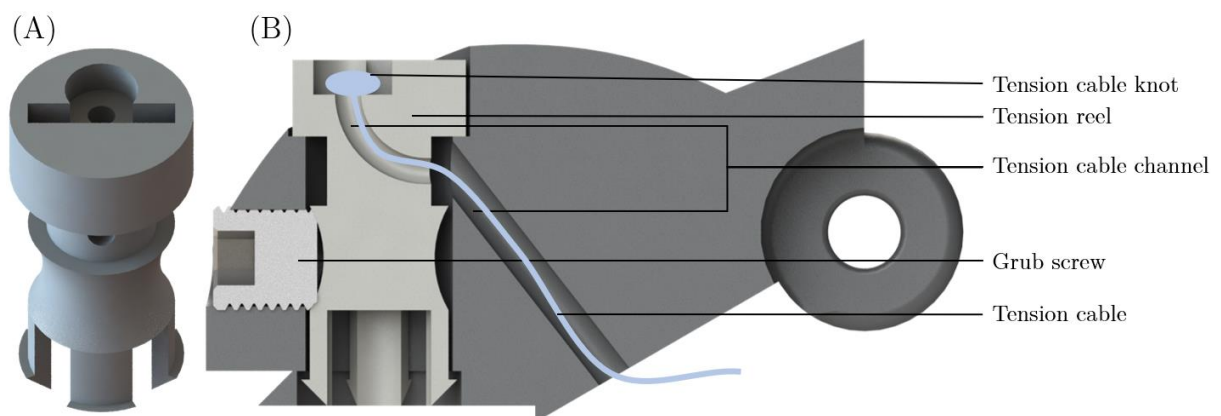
(A) The tension reel. (B) Cross-section of tension tuning mechanism and its components.
